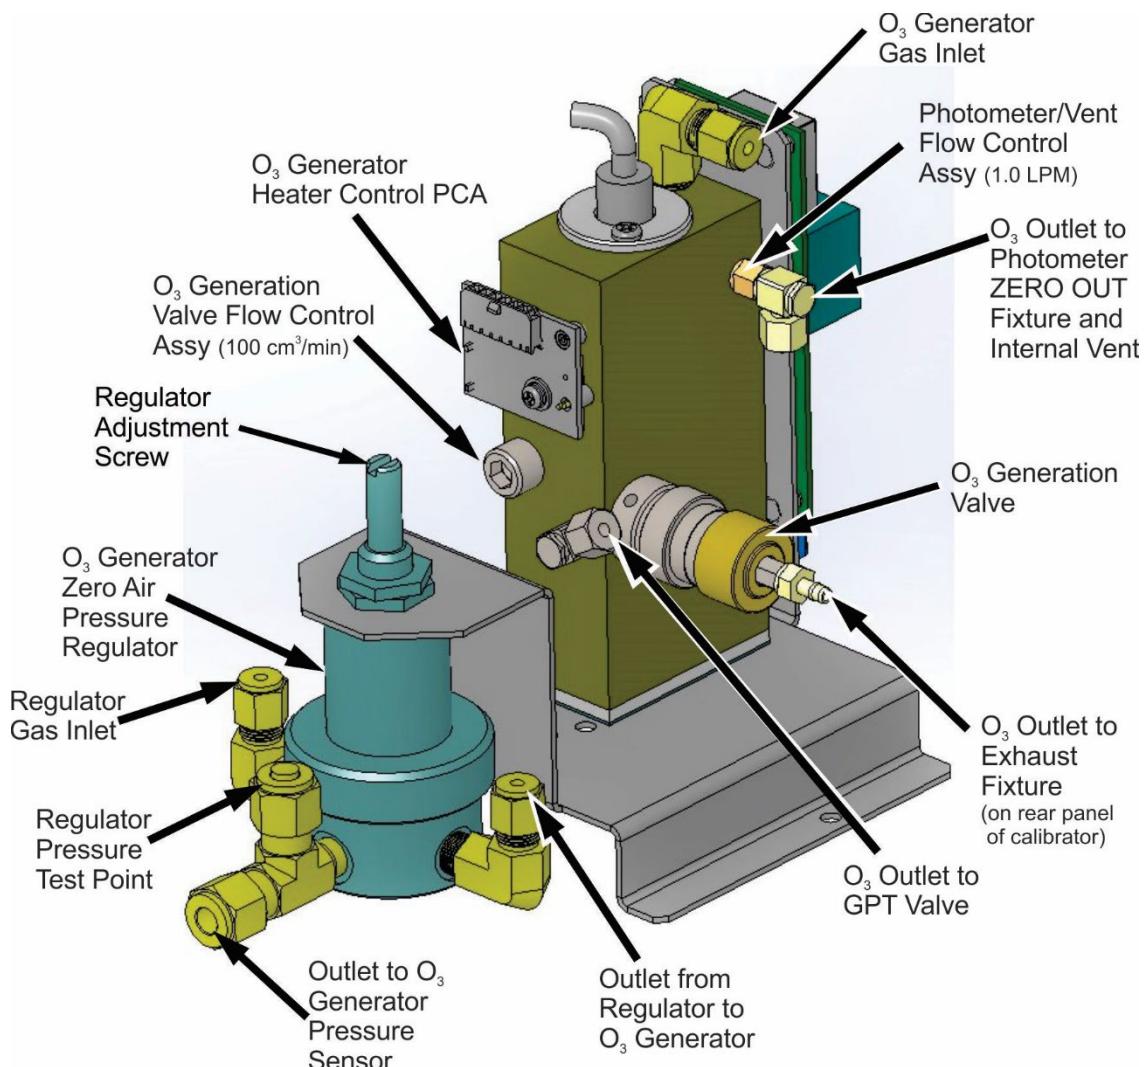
O₃ Generator Valve and Gas Fixture Locations
